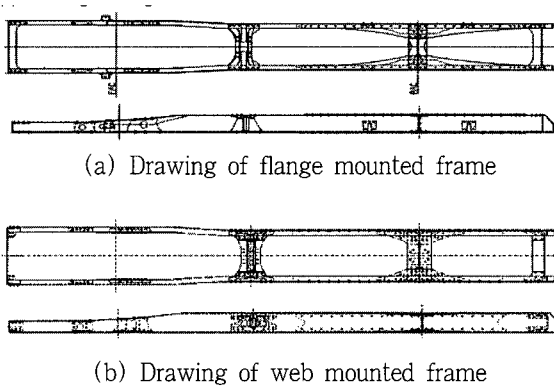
The drawing of the flange and web mounting frame of the large-sized truck
